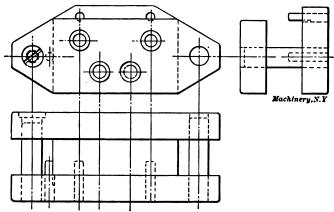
Jig in Fig. 84 Improved by adding Locating Pins
